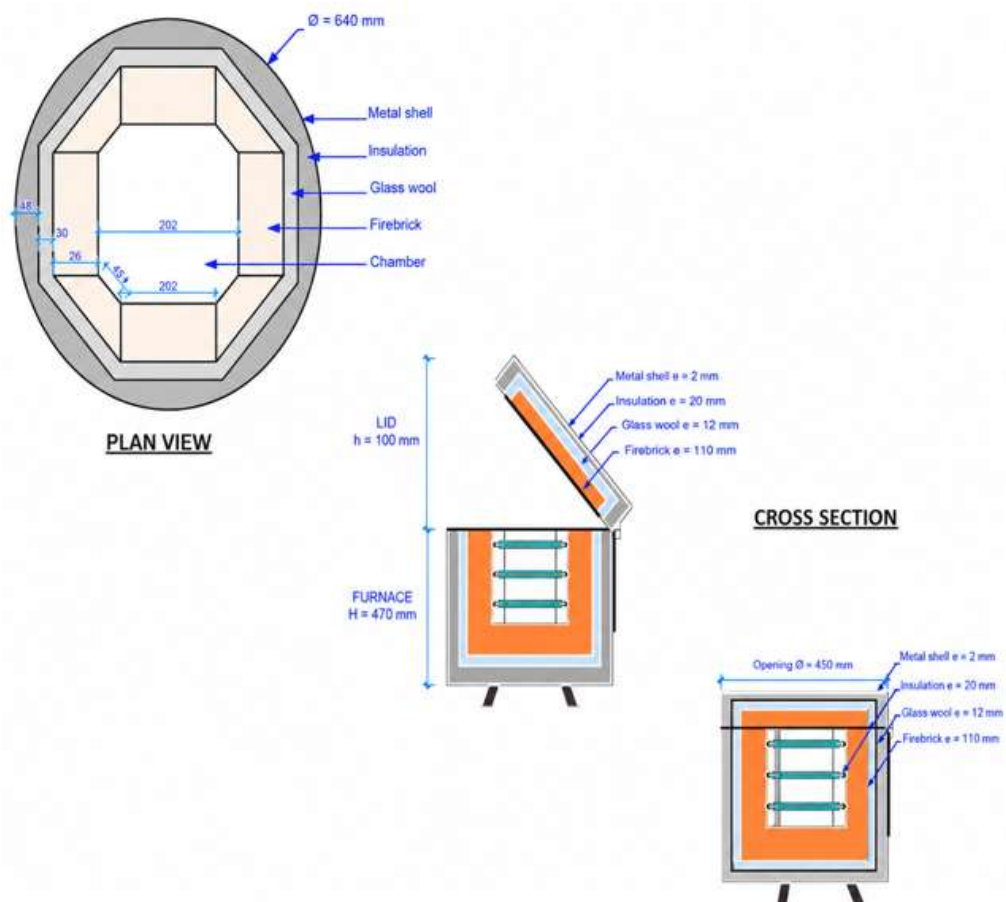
Complete multi-view technical drawing of the furnace assembly (comprising detailed front, profile, and plan views with comprehensive engineering dimensions).
